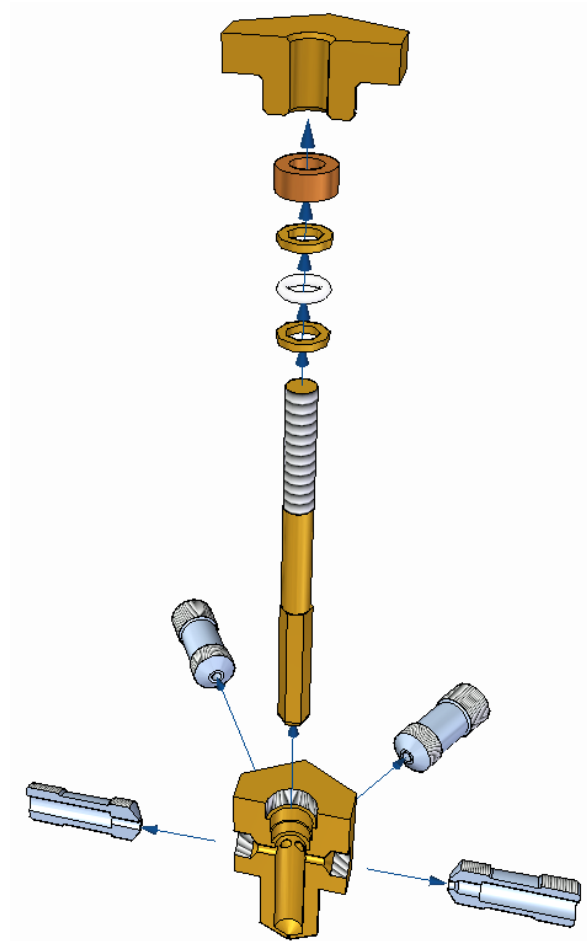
Exploded cross section view of the designed extrusion nozzle
